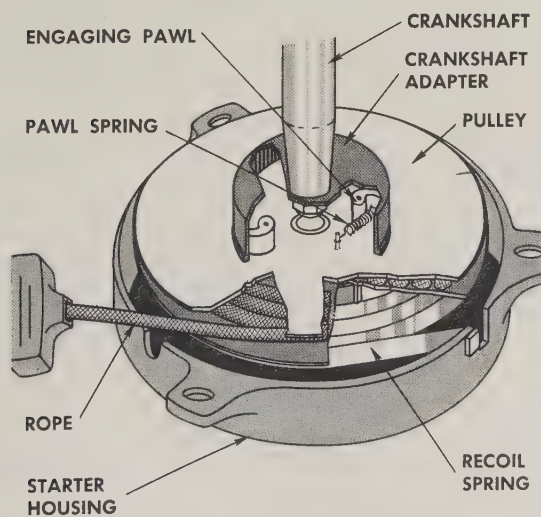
A partially cutaway view of a typical rope-rewind starter.
